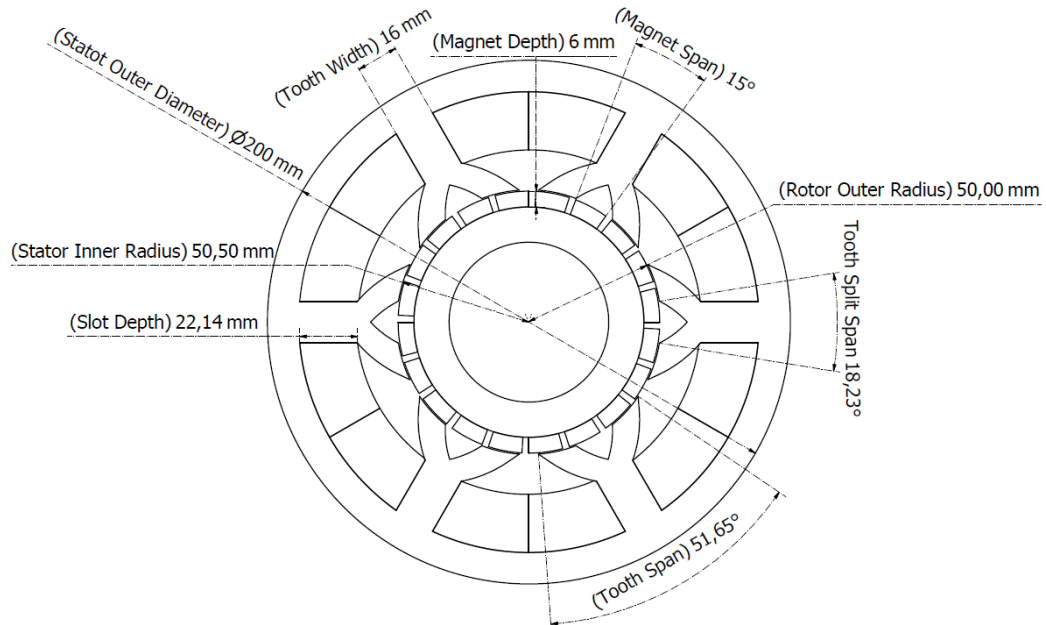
The Split Tooth Machine Considering a Frame Size of 200mm.
